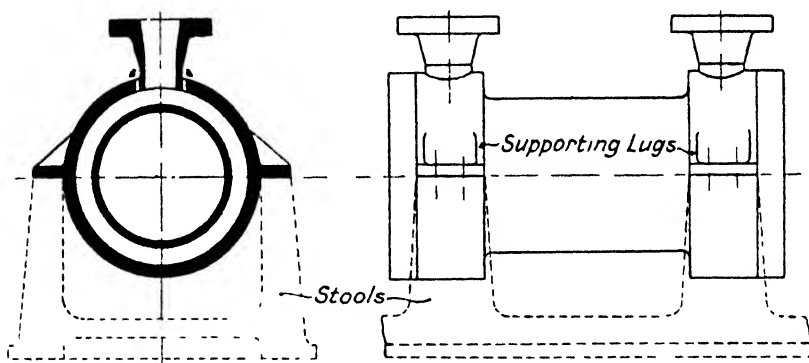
Method of mounting casing of multi-stage pump handling hot liquid.
